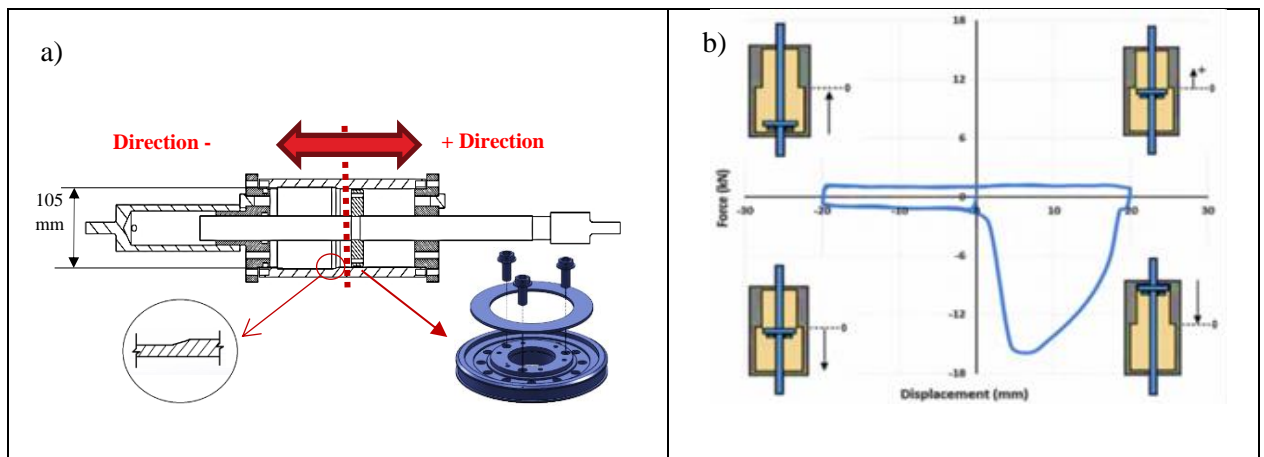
a) Scheme of the modified cylinder. b) Step-by-step representation of position of the modified piston in the modified cylinder under a sinusoidal loading.
